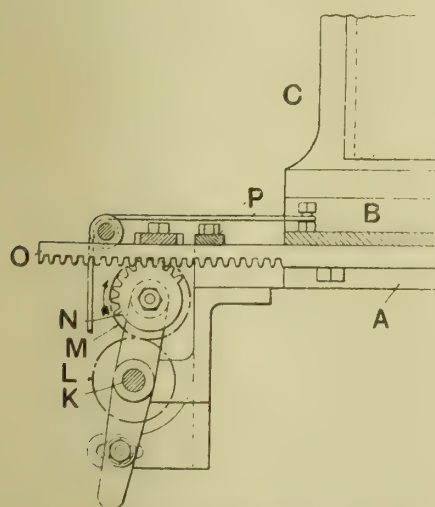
EGLIN'S GEAR-CUTTING MACHINE.
